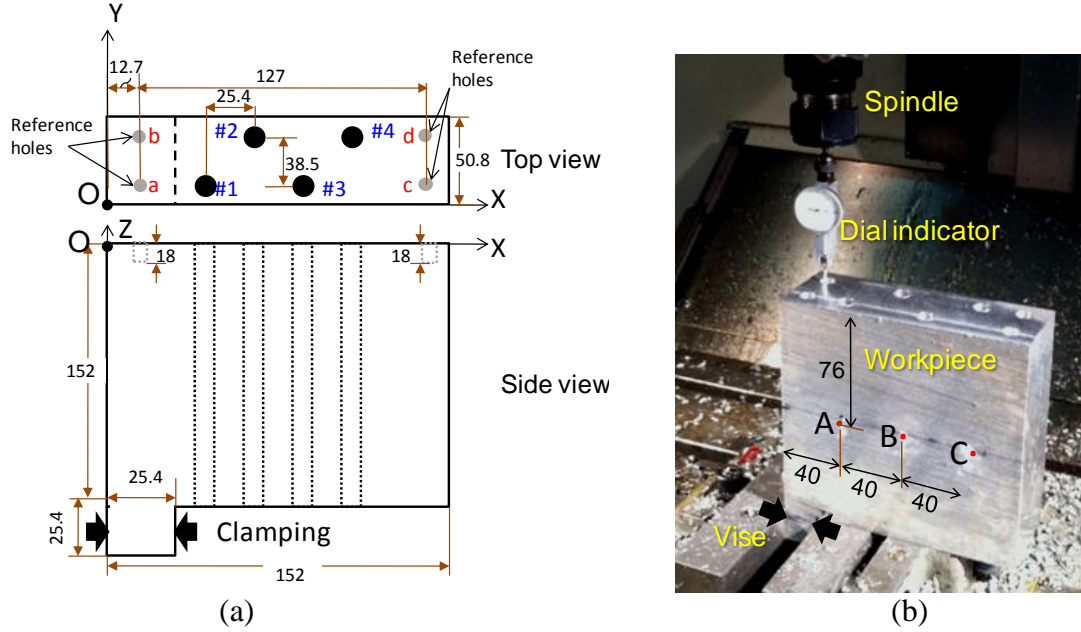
Setup II: (a) workpiece design for thermal distortion experiment and (b) the measurement of hole positions using dial indicator (unit: mm)
